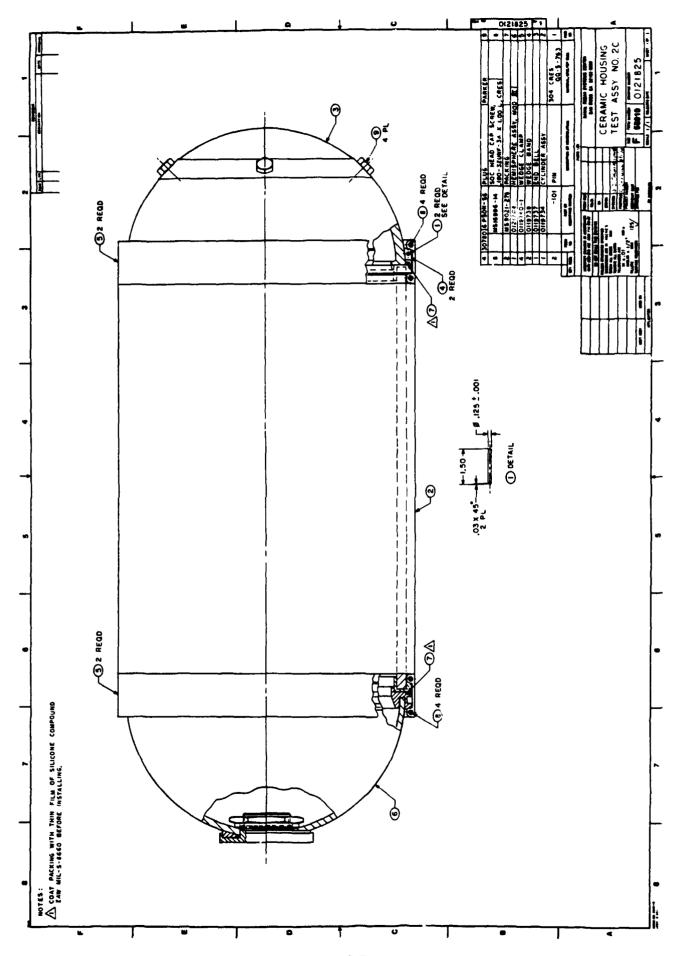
Ceramic housing test assembly 2C incorporating the Mod 3 ceramic builthead.
